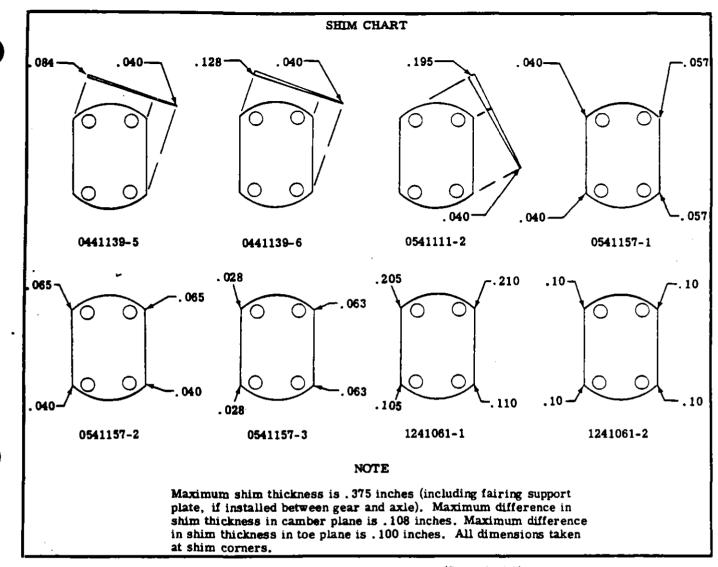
Main Wheel Alignment (Sheet 2 of 2)
